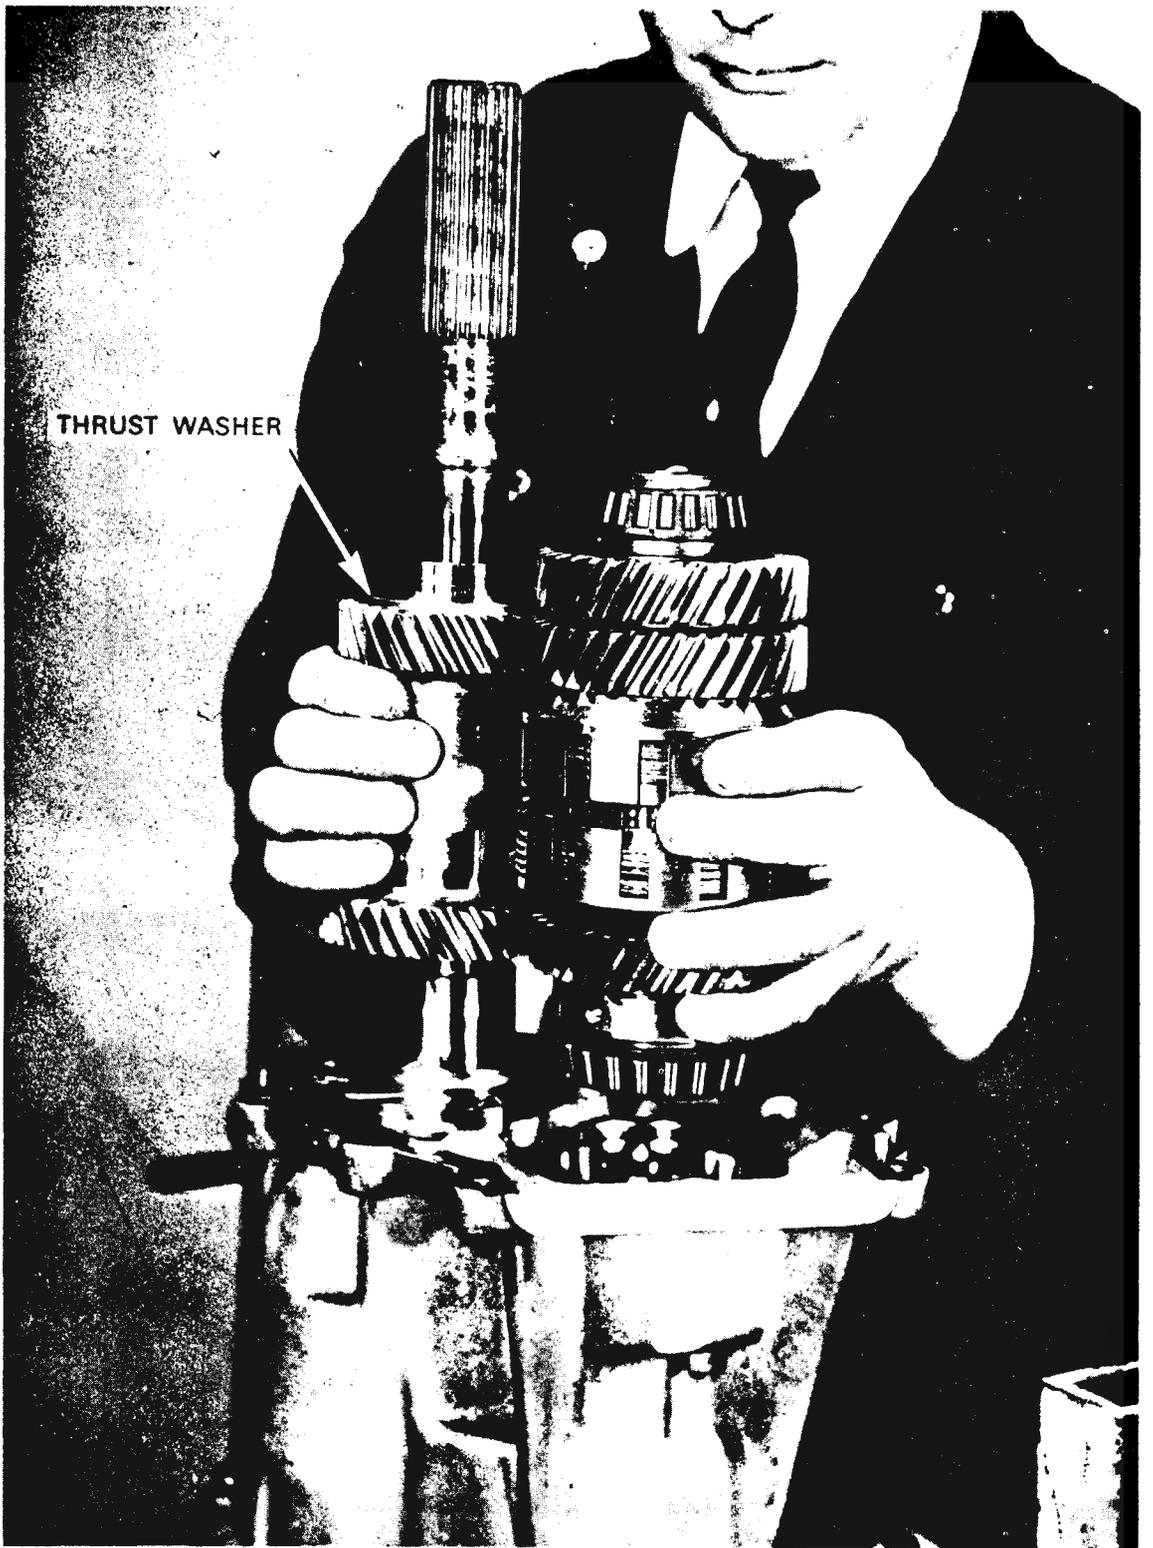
CONTROL UNIT ASSEMBLY AND CONTROL GEAR SLEEVE REMOVAL.
